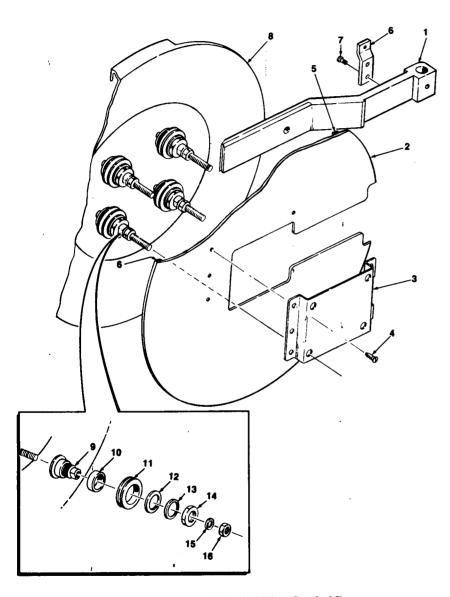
DOOR ASSEMBLY (Part 2 of 2).
